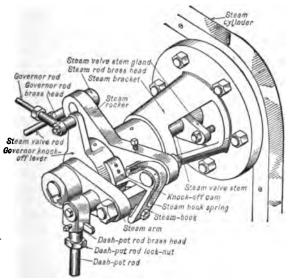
ASSEMBLY OF CORLISS RELEASING GEAR.
